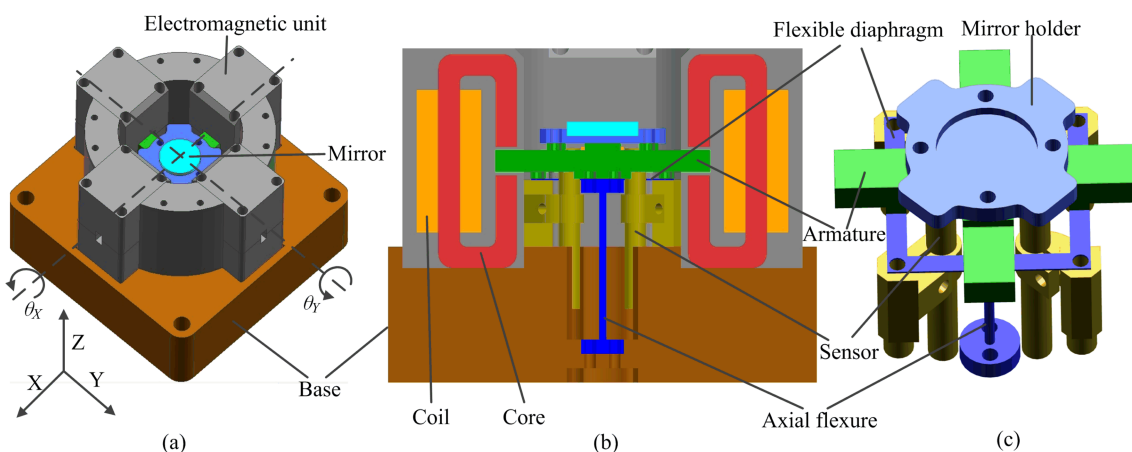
(Color online) Structure overview of our FSM. (a) Three-dimensional CAD shape of the FSM, (b) cross-sectional view of the FSM, (c) flexure support system of the FSM.
